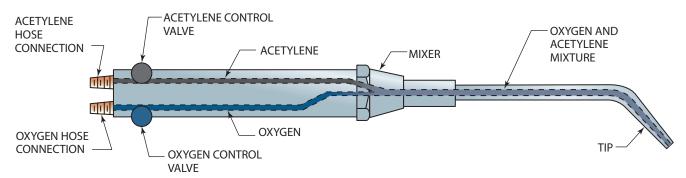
Schematic drawing of an oxyacetylene welding torch.
